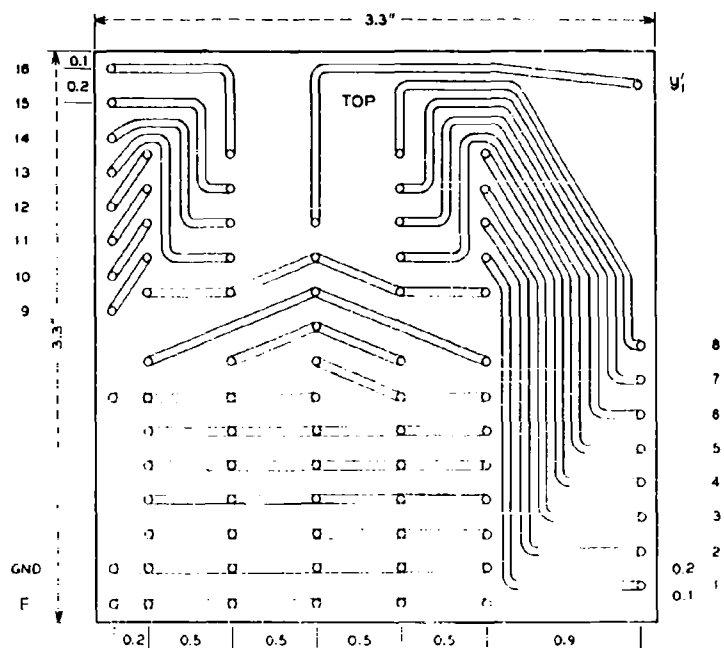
Layout plan of four clock phase-generator circuits on printed-wire board showing position of integrated packages, PNP transistor, click reducer, and the tantalum film package.
